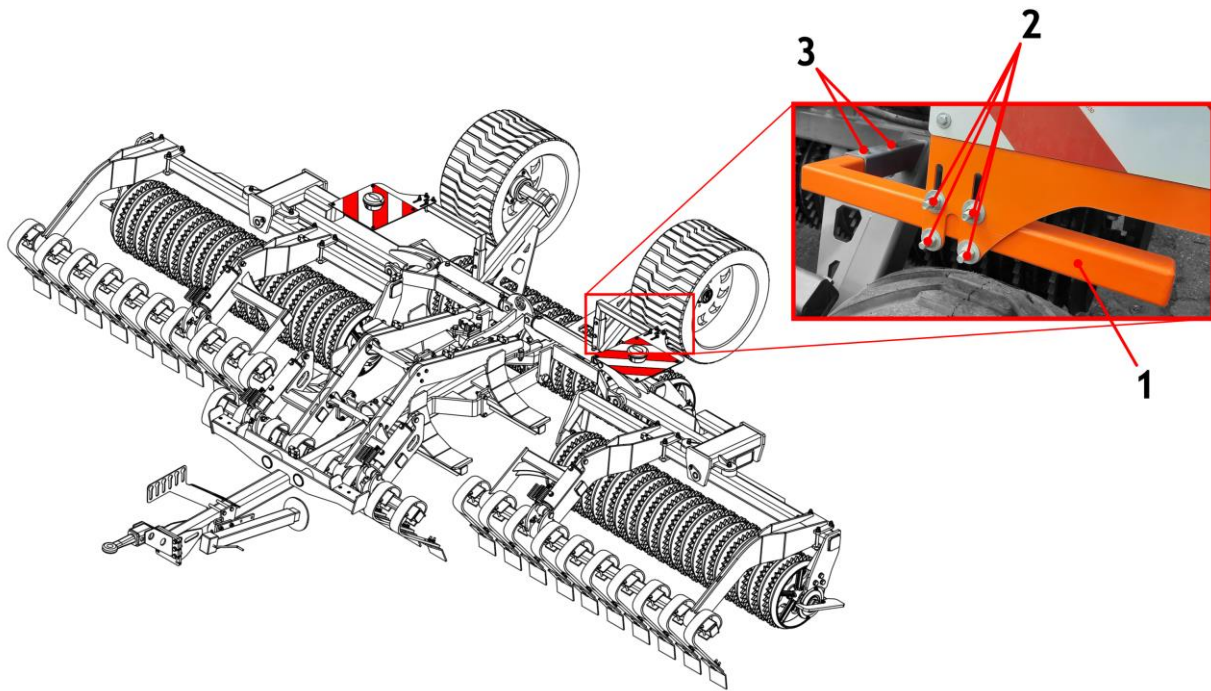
Positioning and mounting of warning-light device on cultivator roller MCB SWING (option) (1 - panel bracket, 2 - mounting clamps, 3 - mounting bolts)
